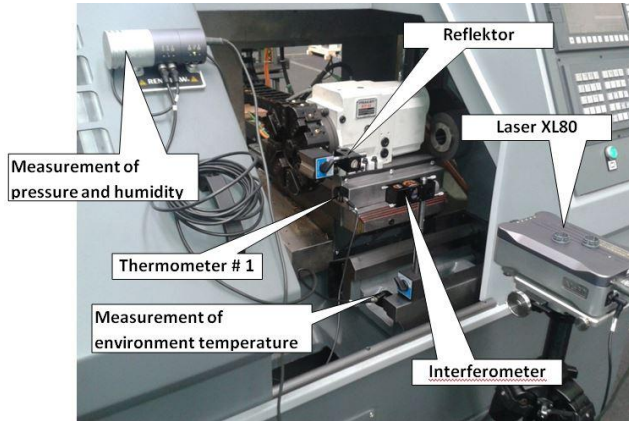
View of a lathe for turning non-circular surfaces during accuracy and repeatability testing with a laser interferometer
